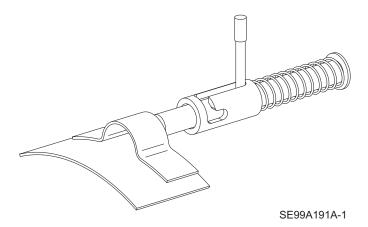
DEAD BOLT TYPE STEERING LOCK ENGAGED
